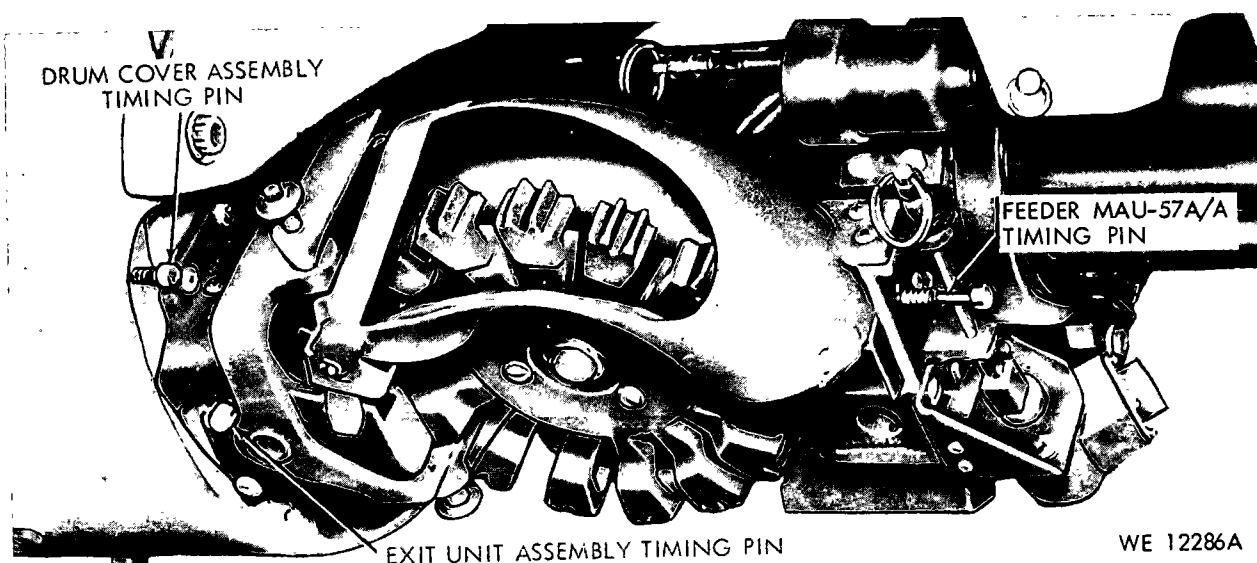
Feeder MAU-57A/A, exit unit assembly, and drum cover assembly timing pins.
